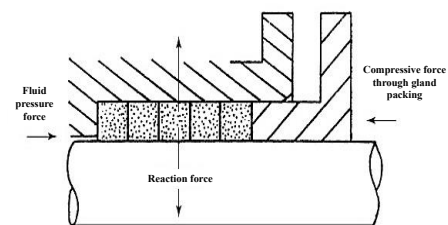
Cutaway sections of 5-layer packing contact seal [7]
